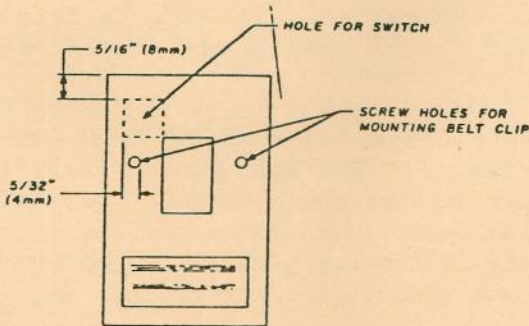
LOCATION AND DIMENSIONS FOR MOUNTING 4 POSITION DIP
